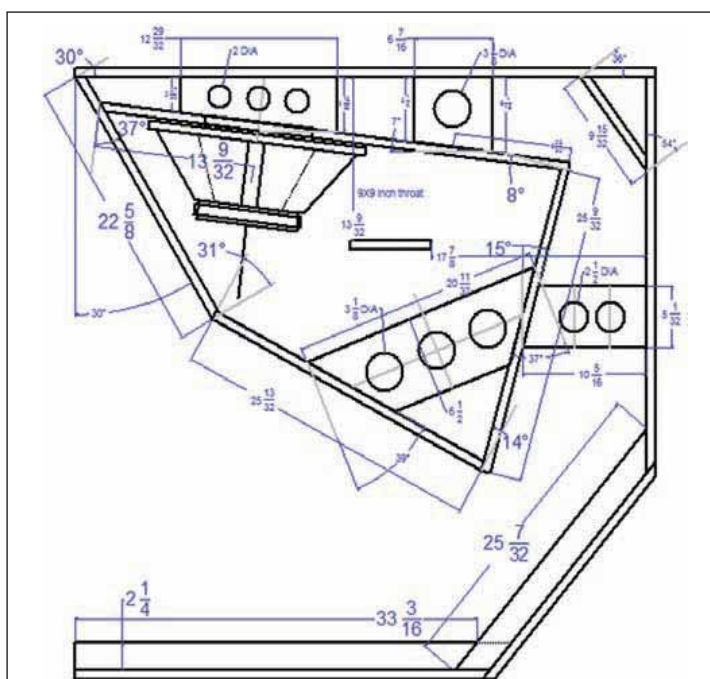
Cabinet's side that includes the placement of pairs of braces and additional measurements and angle dimensions. Circles are cut in the braces to reduce weight.
